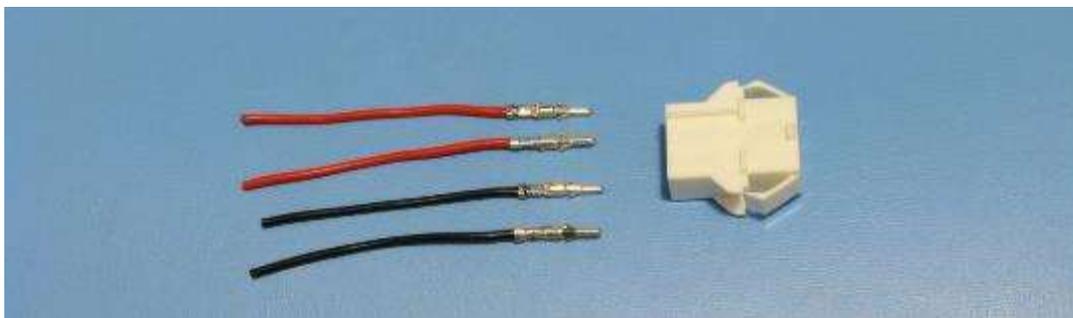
Cut and peel the red and black wires. Crimp and solder to the connector pins
